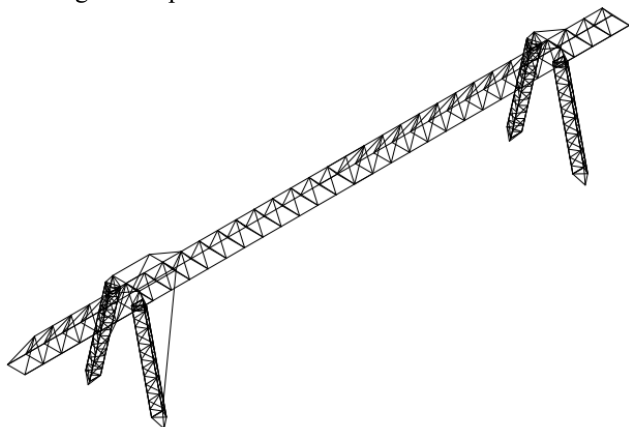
Isometric view of the three dimensional wire model of the gantry crane
